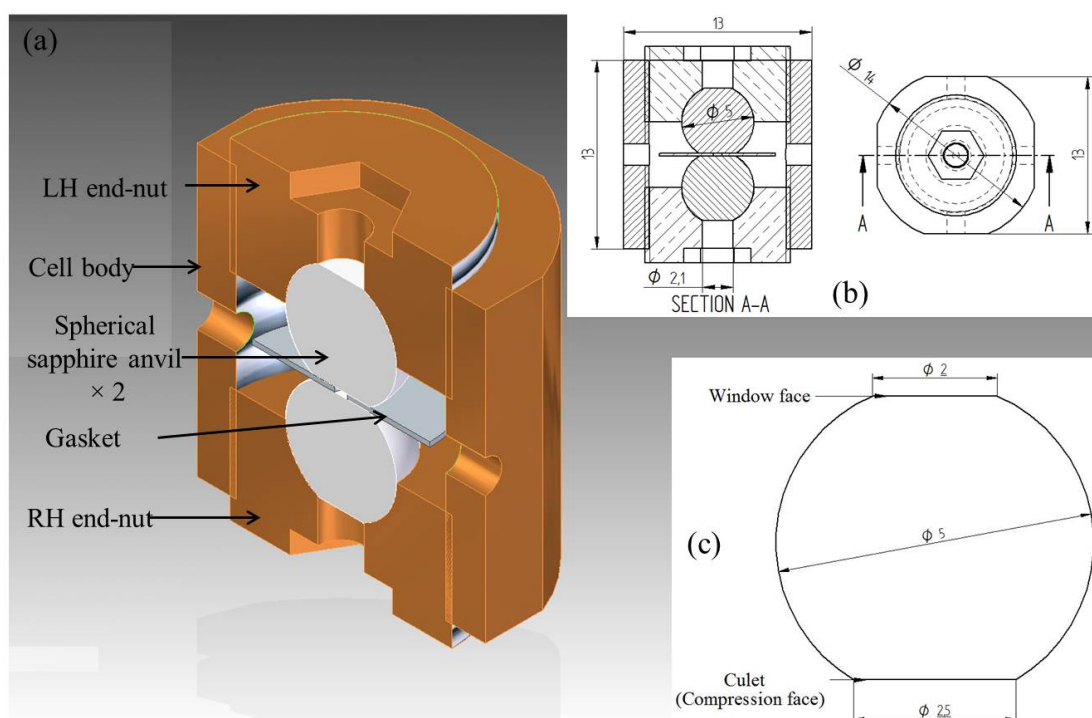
(a) Section view of the first design concept of T-SAC; (b) CAD drawing with key dimensions; (c) The dimension of the spherical anvil.
